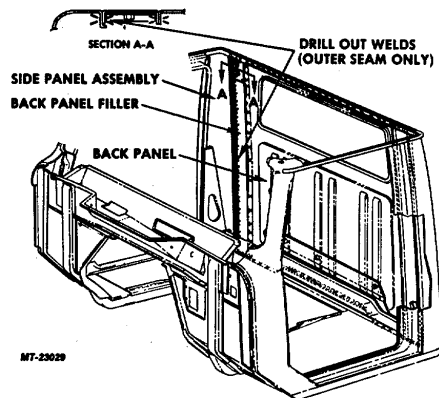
Side Panel to Back Panel Spot Welds (Right Corner 90" Wide Cab Shown)
